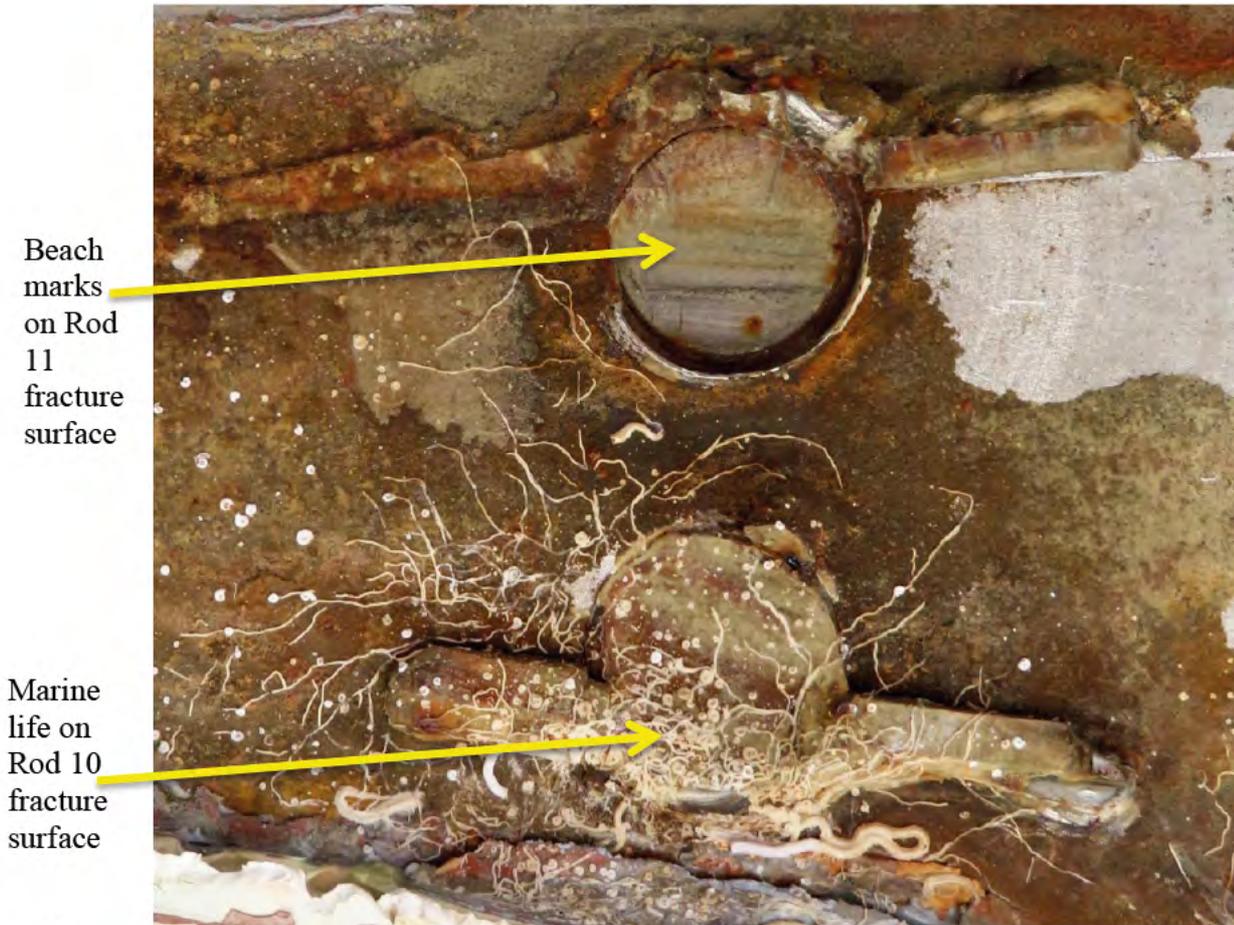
Showing fracture surfaces at positions 10 and 11.
